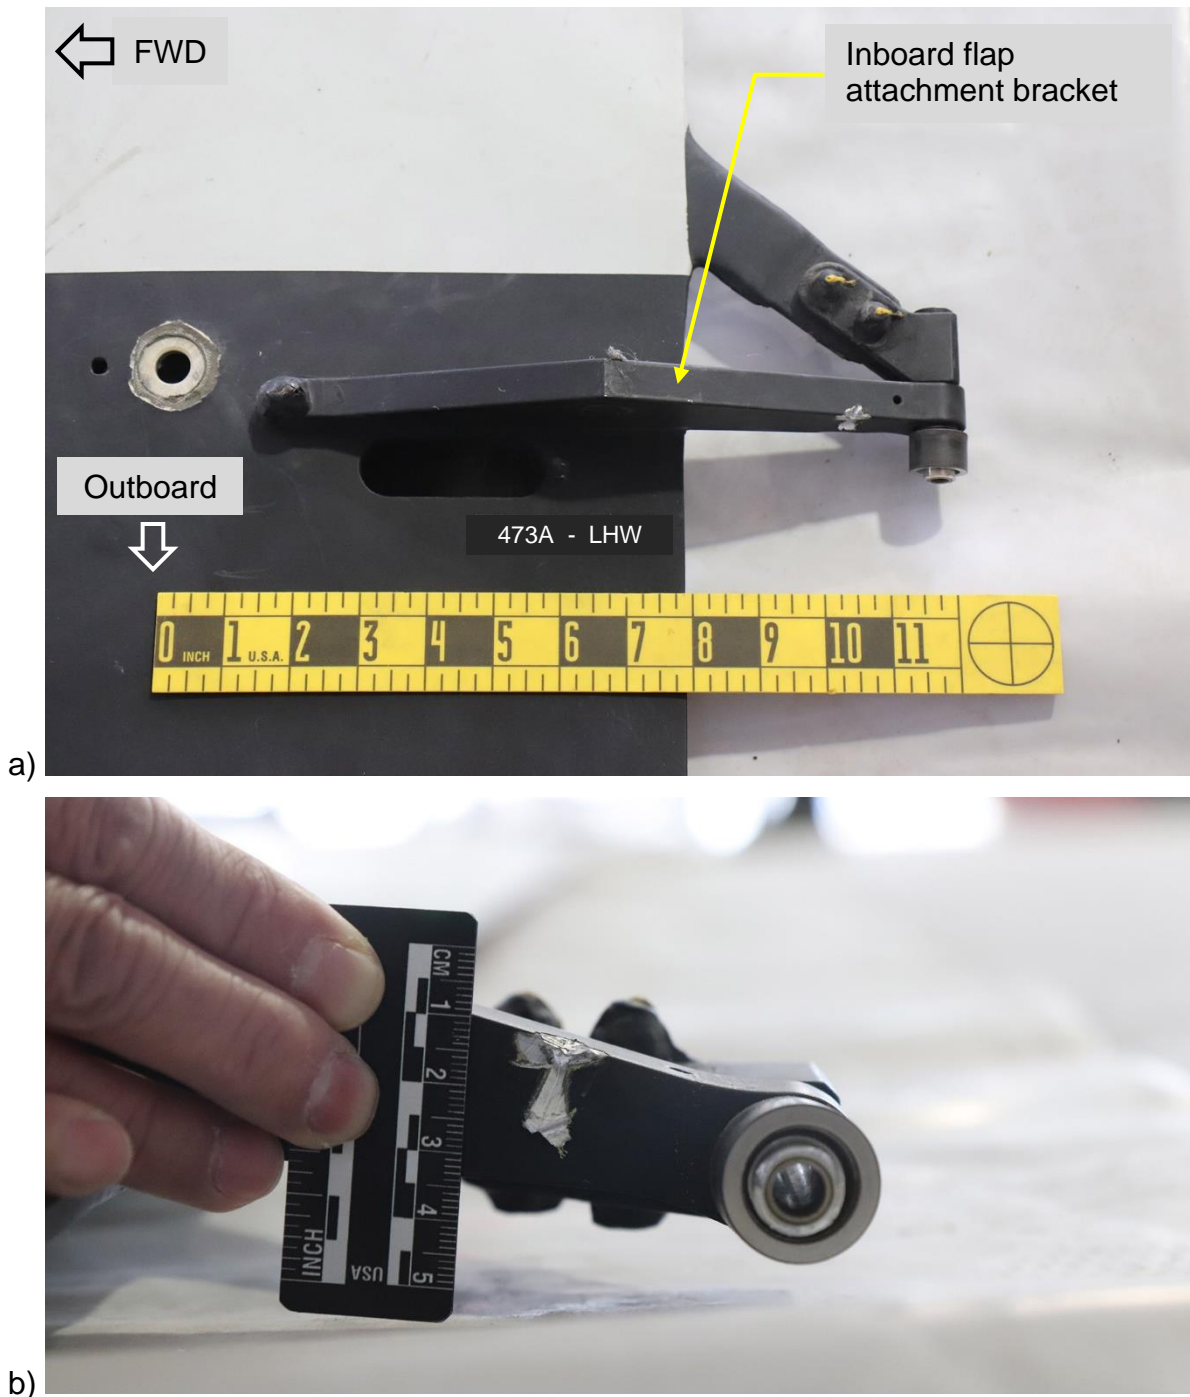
Inboard flap attachment bracket for the LHW servo flap: a) View of lower blade surface and b) view of contact marks on inboard bracket.
